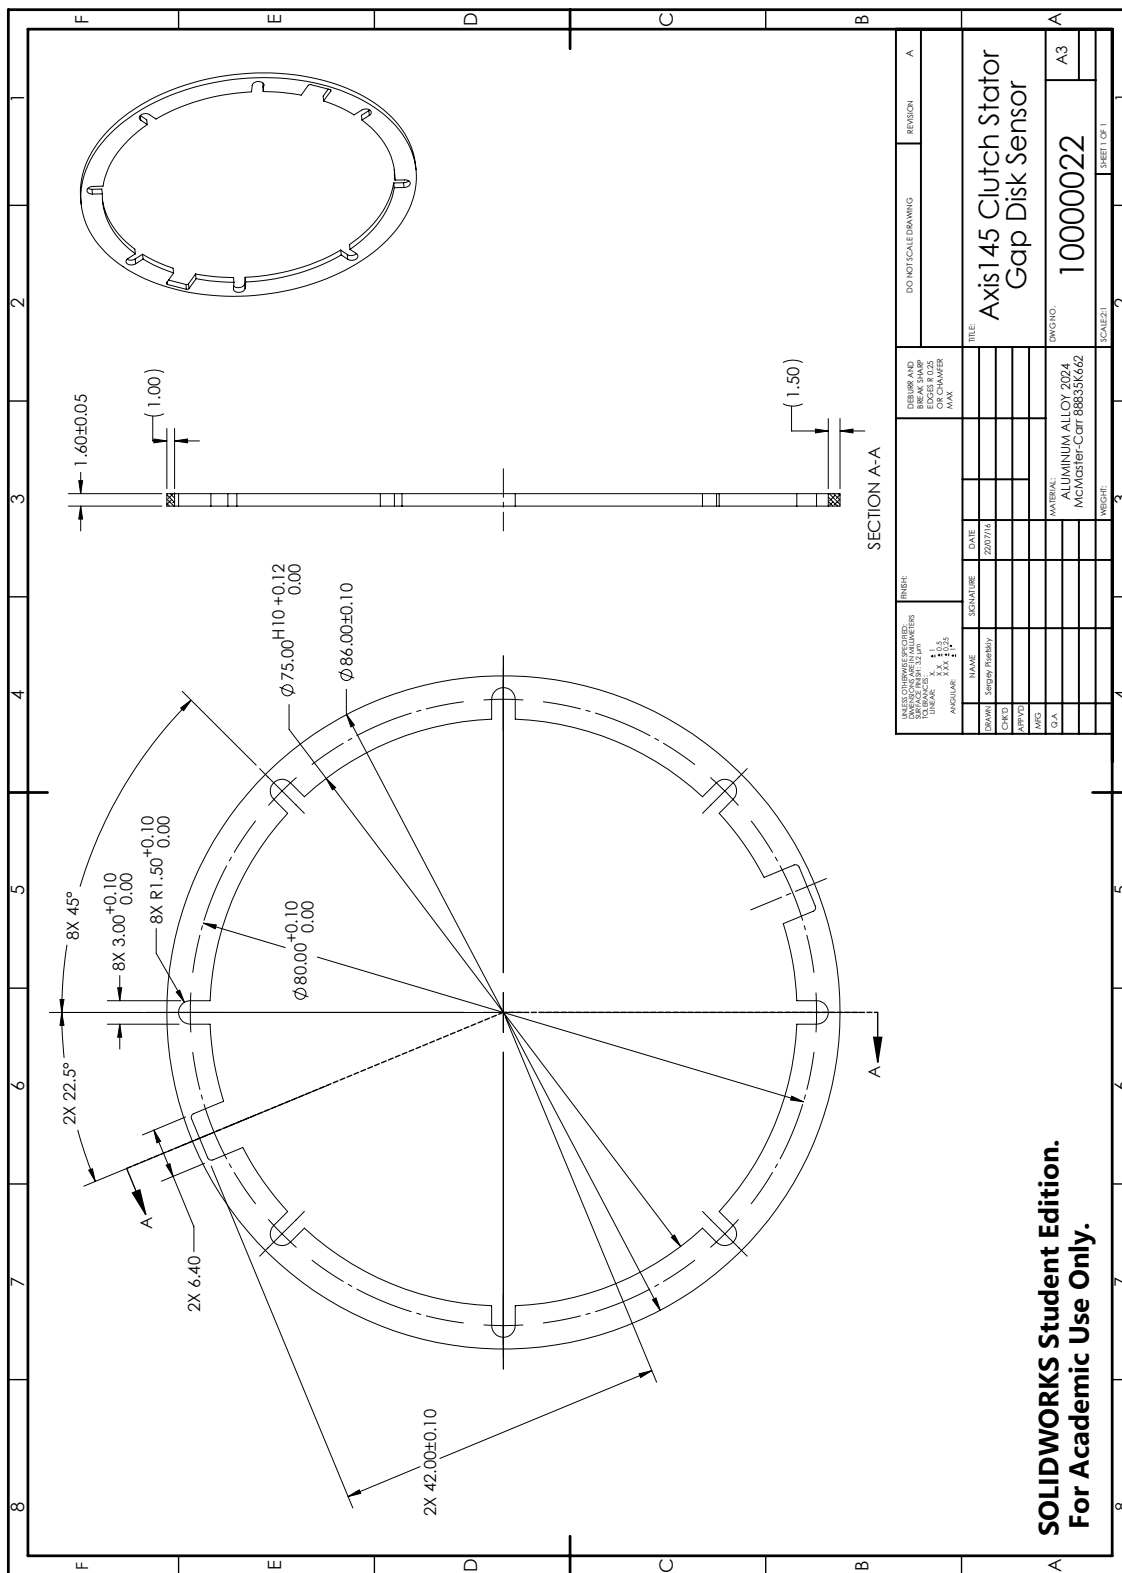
Drawing: Joint 1, 4, 5 clutch stator sensor spacer.
